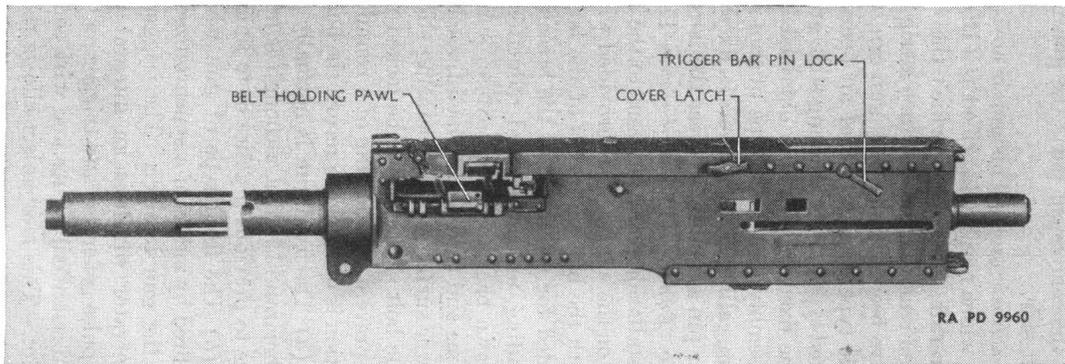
Browning machine gun, caliber .50, M2, aircraft, basic—left side view.
